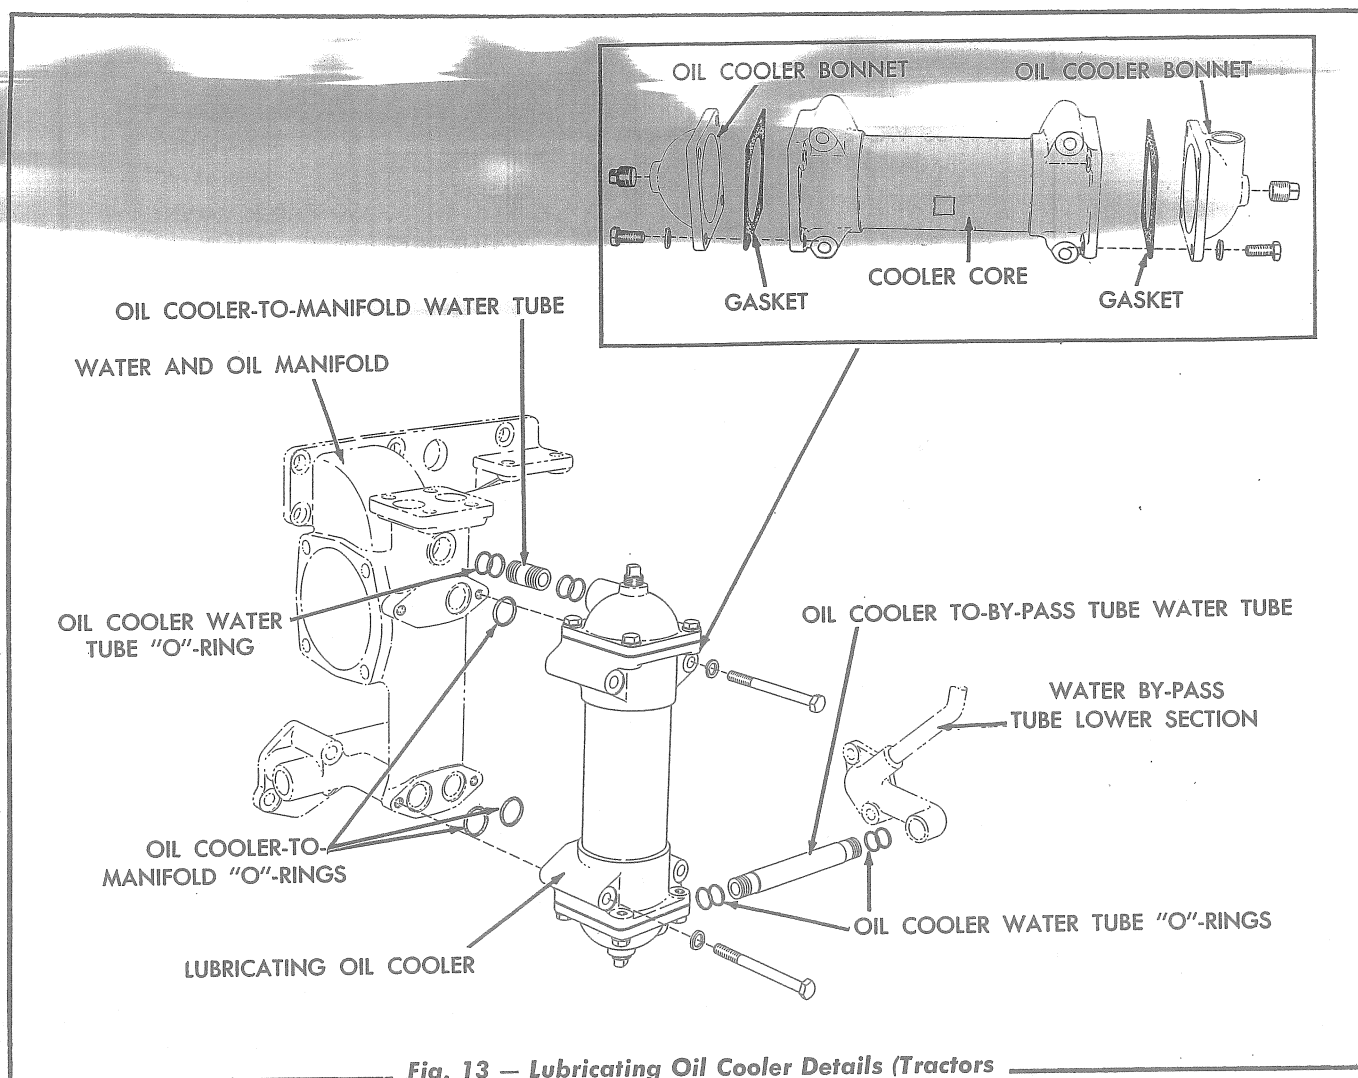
Lubricating Oil Cooler Details (Tractors Serial No. 4001 and Above)
